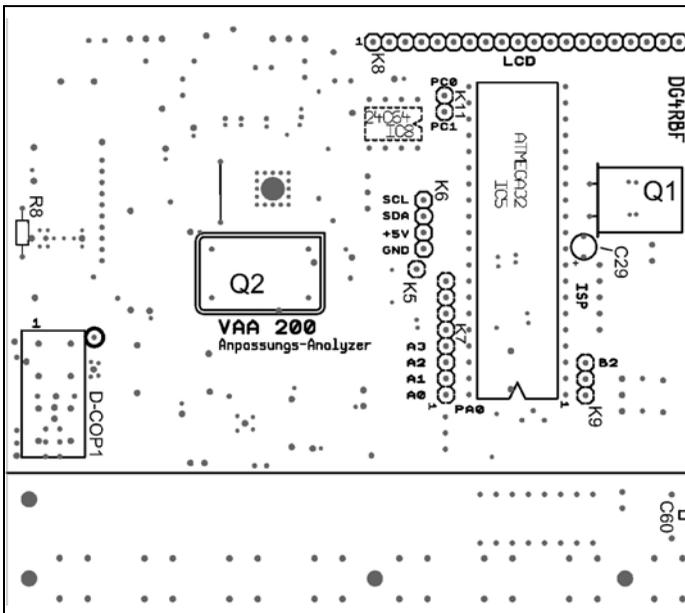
Component layout for the top side of the vector analyser PCB showing the ICs and wired components.
